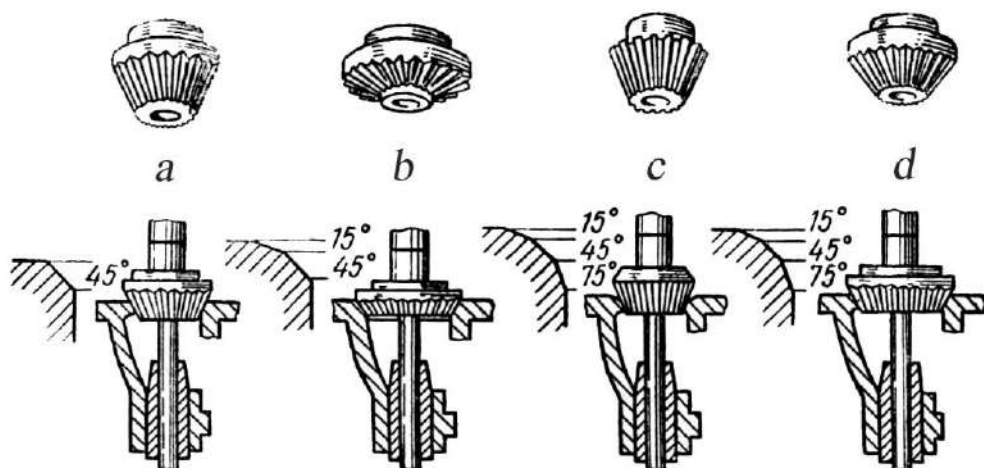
Valve pocket processing by milling cutters. Milling at the angle: *a* – 45°; *b* – 15°; *c* – 75°; *d* – finishing at 45°
